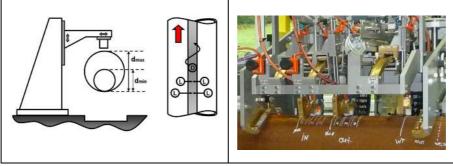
Conventional online weld testing with five ultrasonic probes
